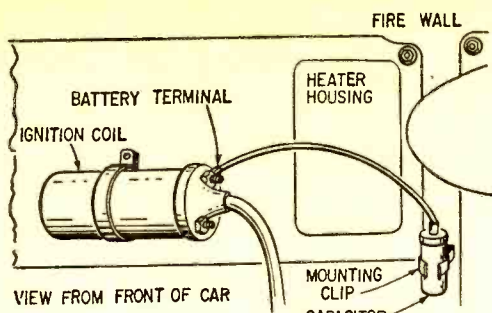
Spring-type mounting clip is a suitable mechanical mounting. Use separate wire for grounding can.
